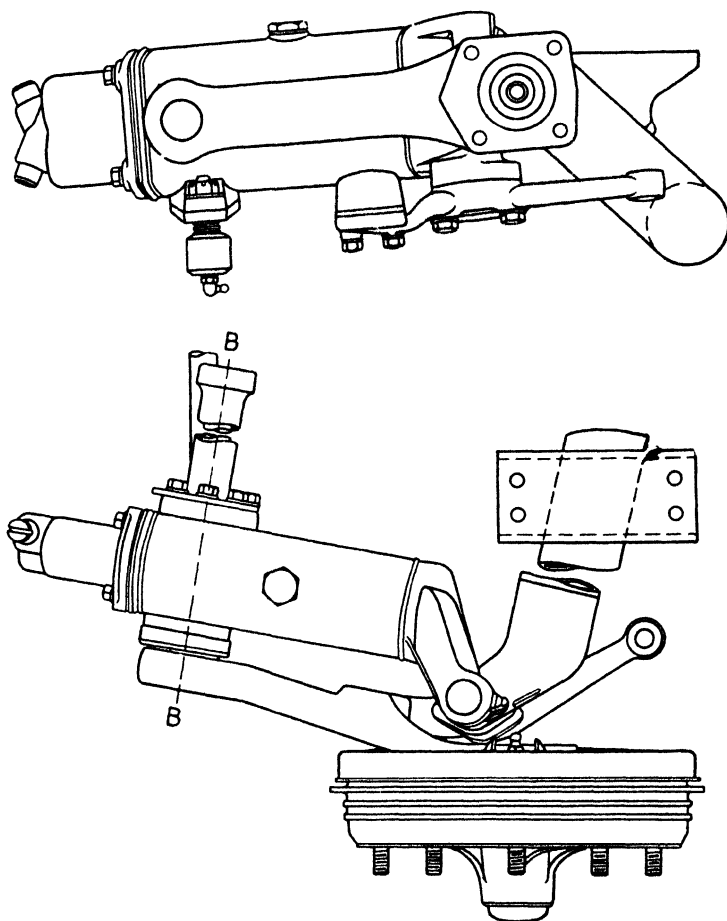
VAUXHALL FRONT INDEPENDENT SUSPENSION, SIDE VIEW AND PLAN.
